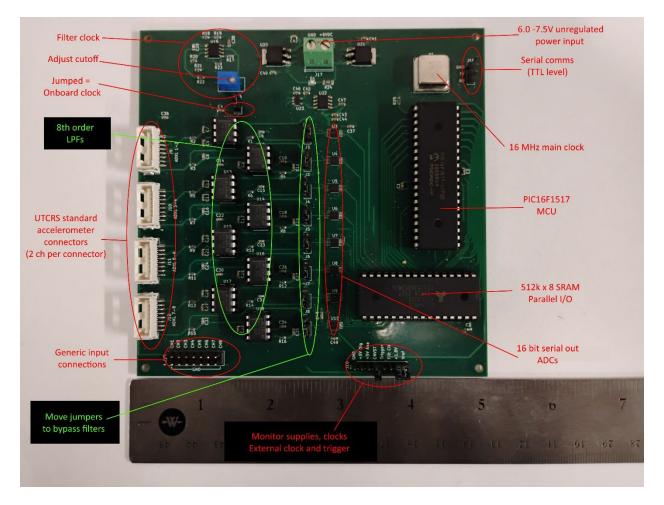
Fabricated wired DAQ board (annotated, Revision 1 shown)
